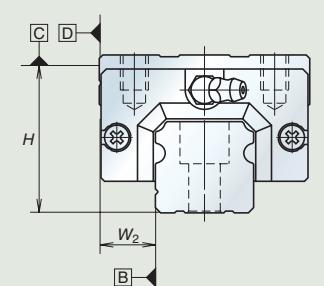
Drawing for accuracy standard (mounting with W_3)
